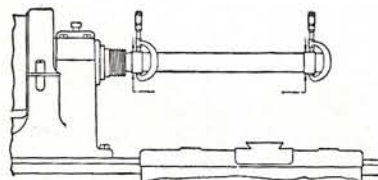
Testing Alignment of Spindle by Machining a Piece in the Spindle.
